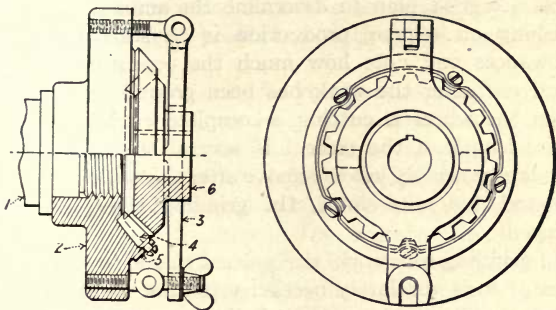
Heald chuck for locating bevel pinions for internal grinding.
